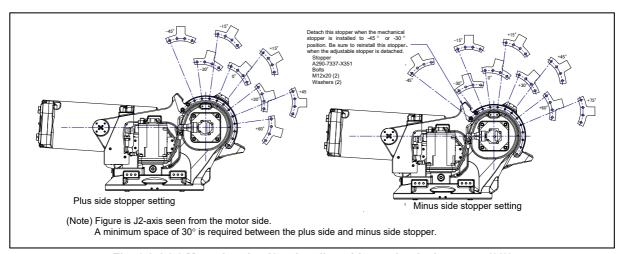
(p) Mounting the J2-axis adjustable mechanical stopper (3/3) (R-2000iC/190U)
